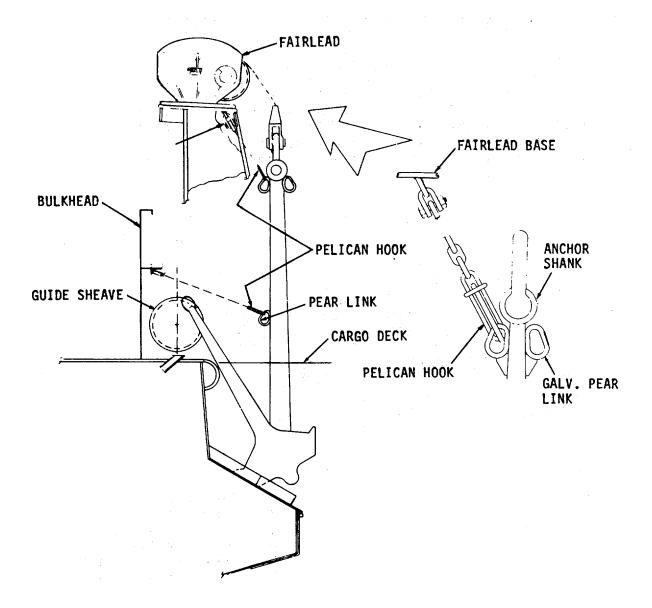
Anchor "A" Frame (Sheet 3 of 3)
